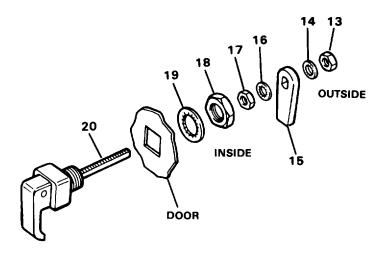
Doors, Latches and Gaskets (sheet 2 of 2)
